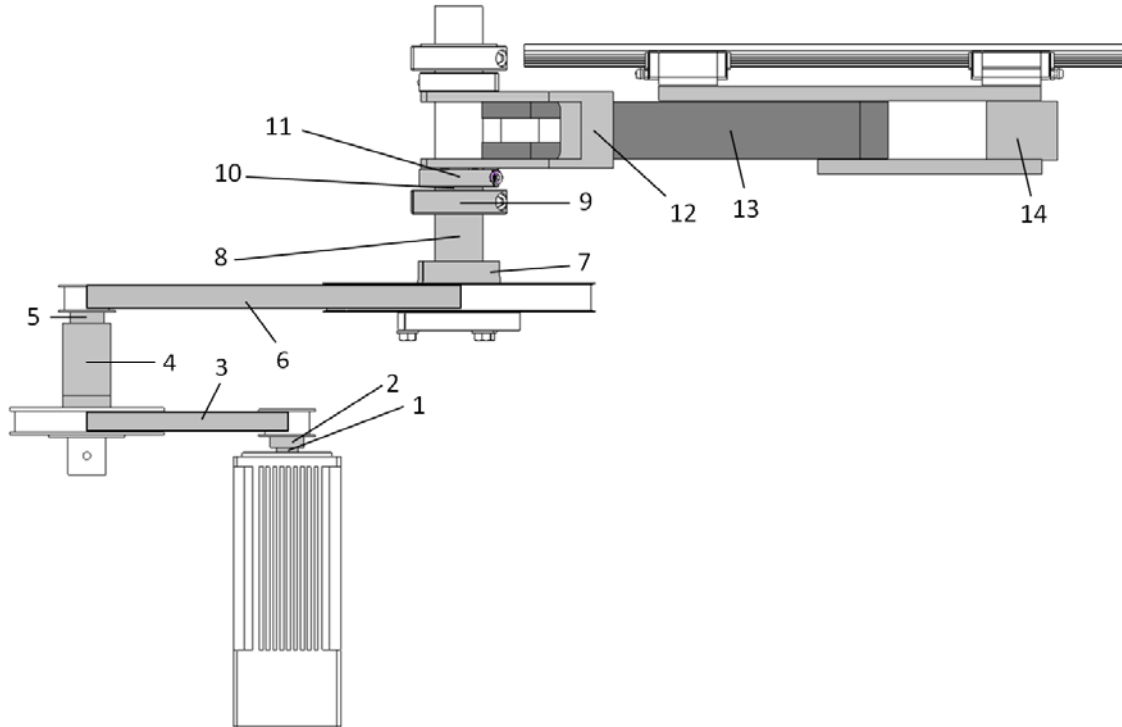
Top View of Single-Motor CSTM, all supports hidden. Spring Components shaded gray.
